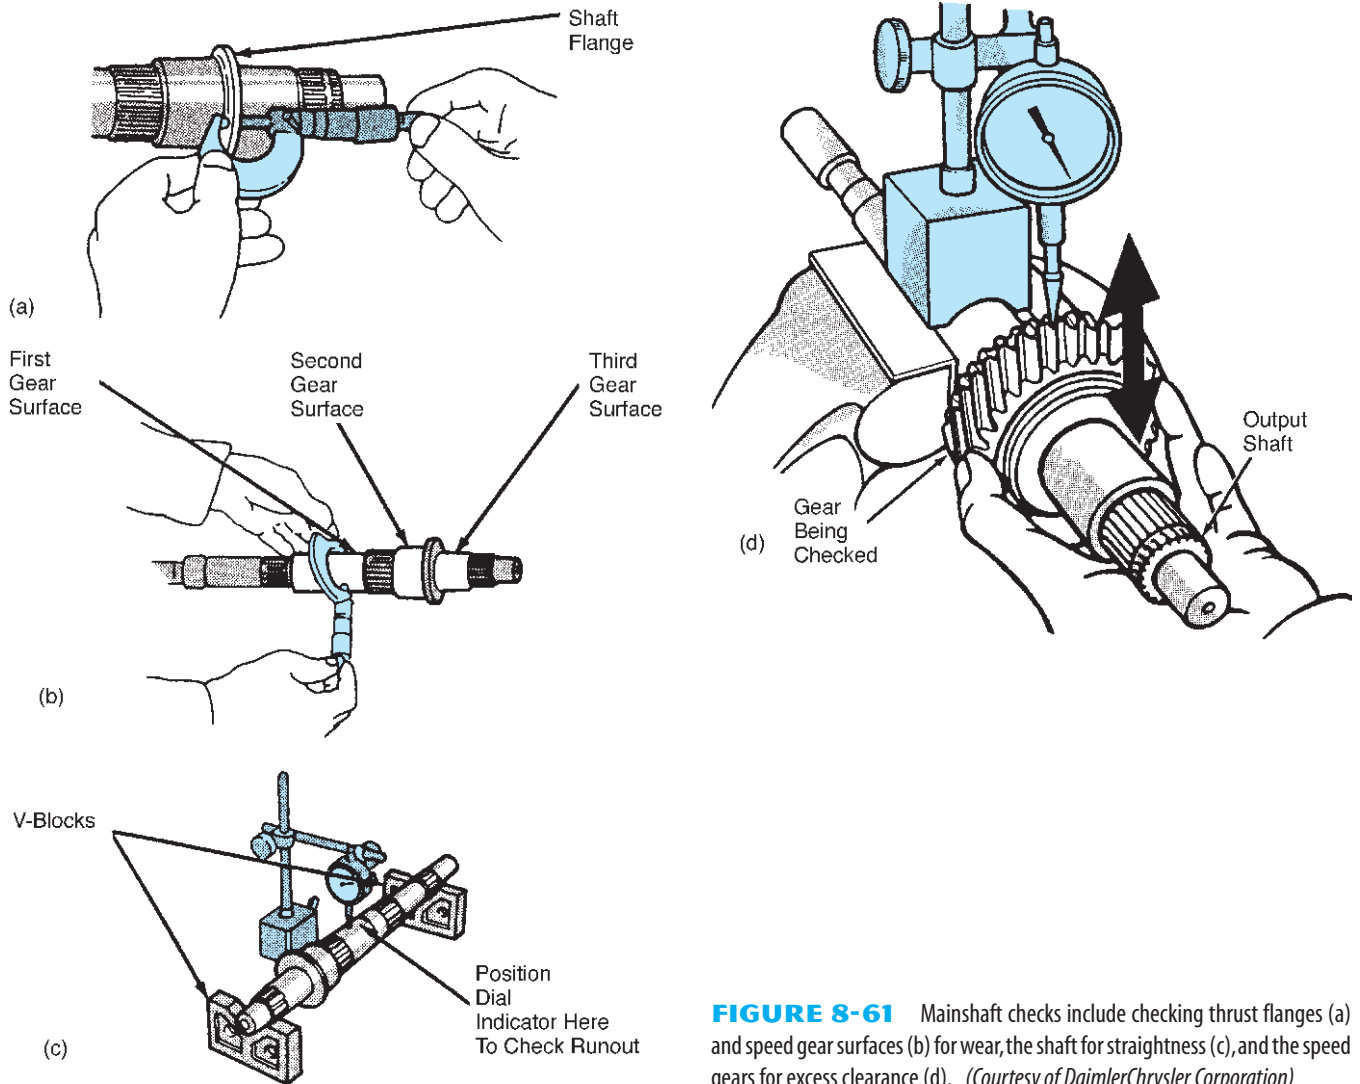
Mainshaft checks include checking thrust flanges (a) and speed gear surfaces (b) for wear, the shaft for straightness (c), and the speed gears for excess clearance (d). (Courtesy of DaimlerChrysler Corporation)
